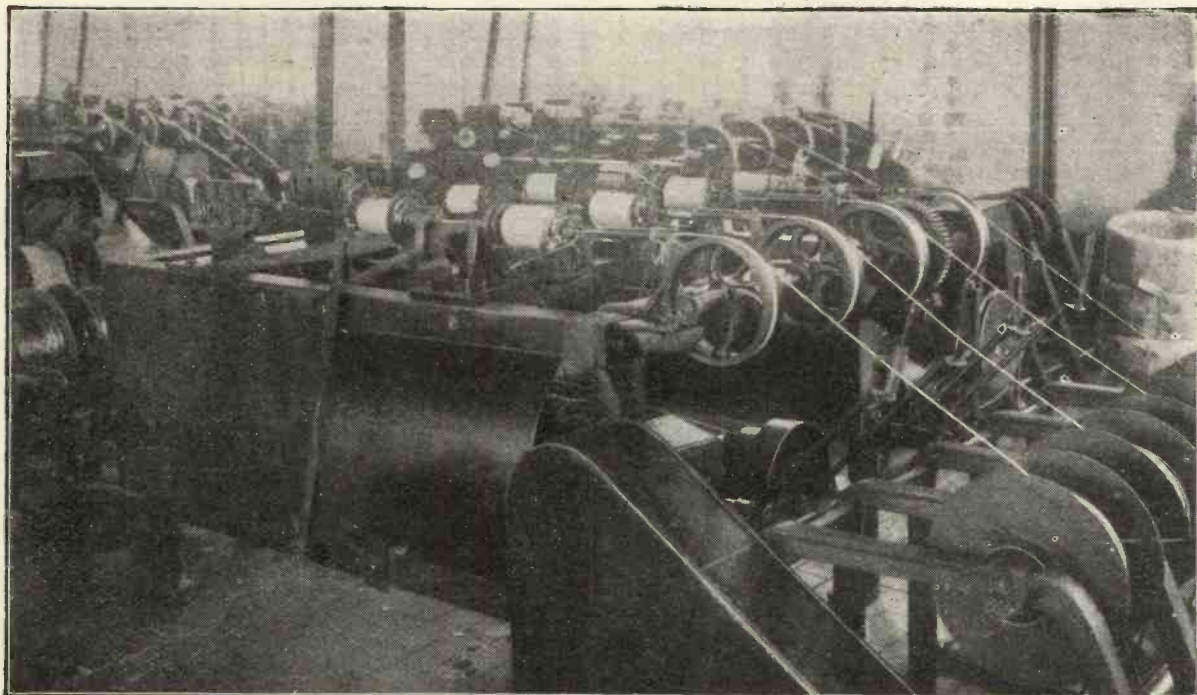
Machinery for double-cotton-covering heavy gauge copper wires.
